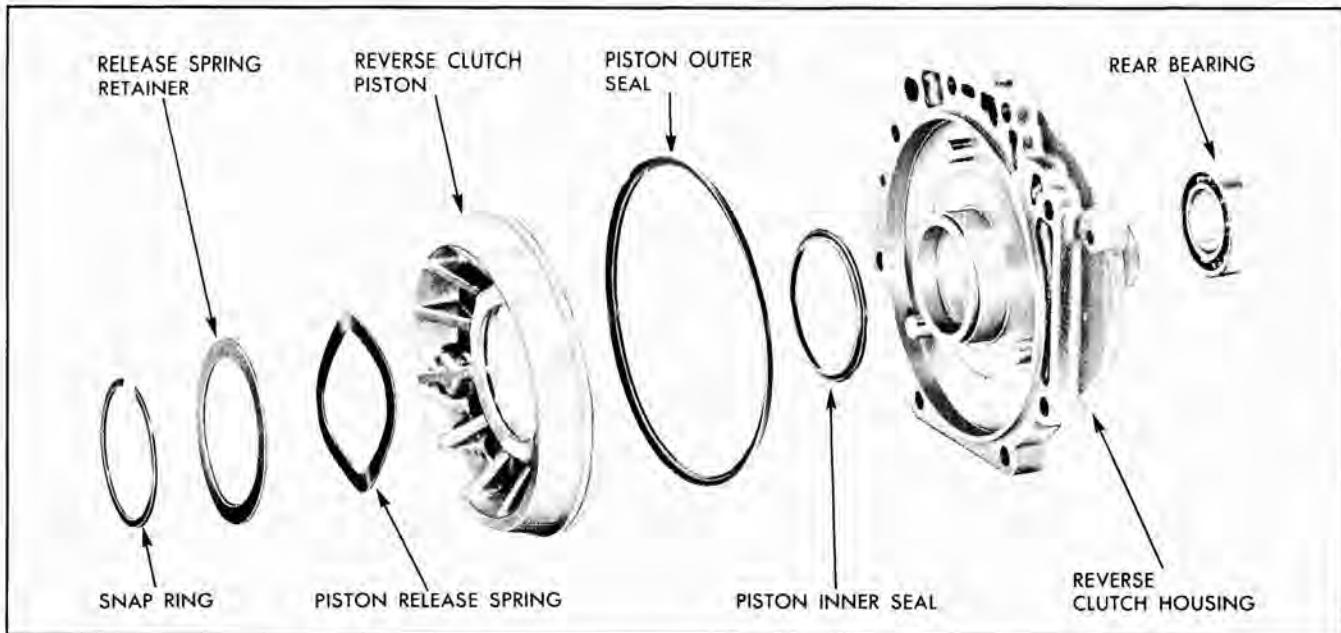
Reverse Clutch Piston and Housing Parts—Exploded
